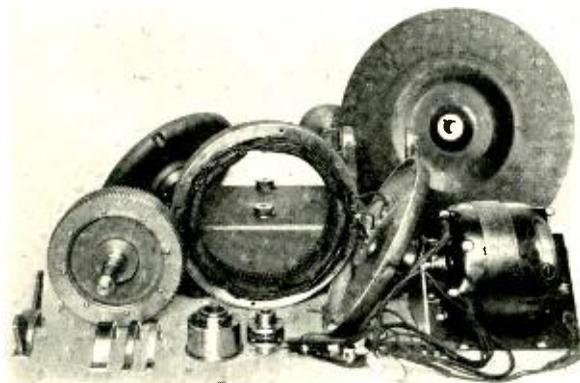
Synchronizing drive disassembled. Rotor and stator of 240-pole motor shown at left
